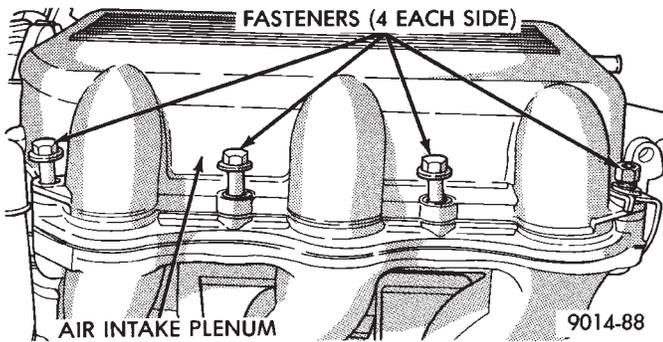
Air Intake Plenum to Intake Manifold Attaching Bolts
